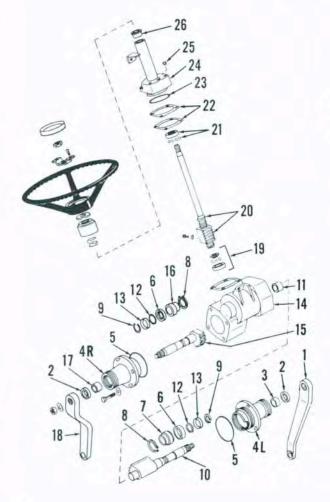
Exploded view of typical manual steering gear used on MF230 and some MF235 models.
